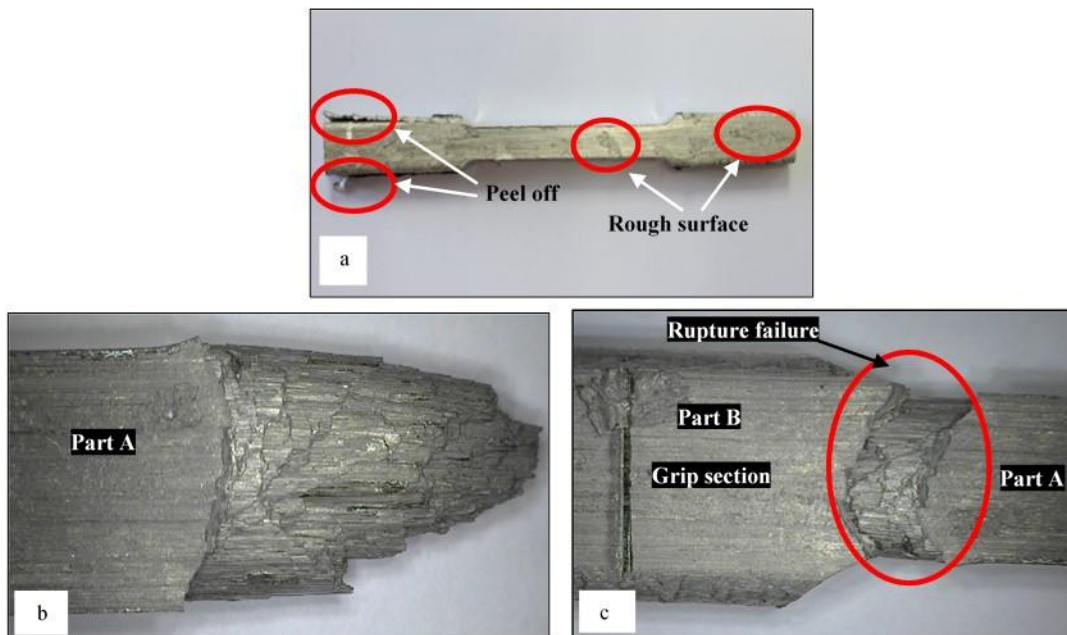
Surface defects of samples after extruded at 400°C pre-heated for 2 hours (S₂): (a) Severe damages on tensile profile, (b) Internal brittle rupture failure took place in the sample and (c) Failure occurred at the area of the grip section
